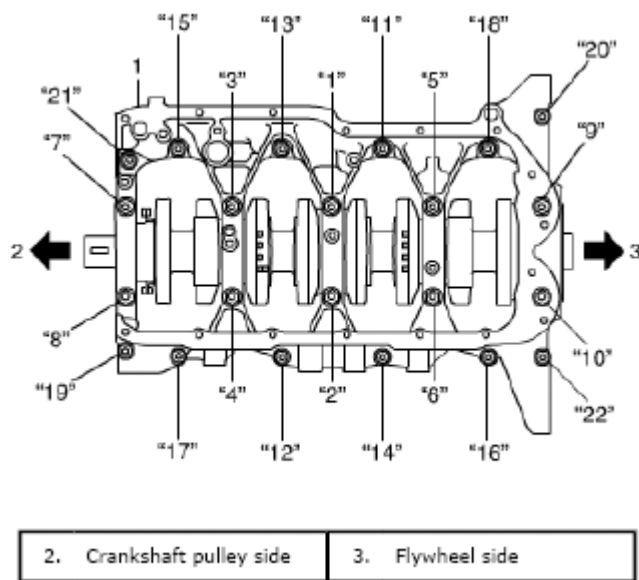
Identifying Tightening Sequence Of Crankcase Bolts
